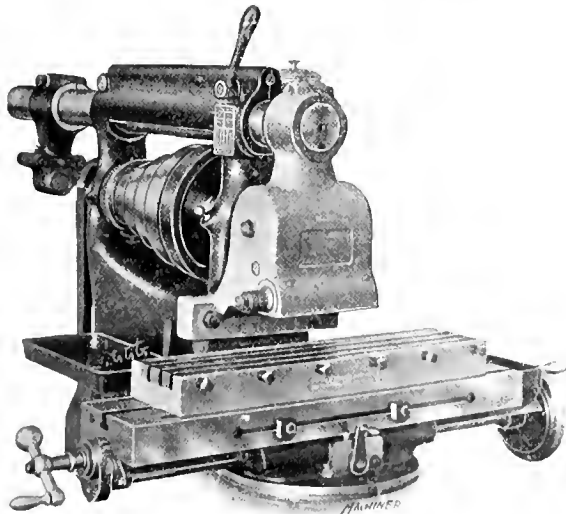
The Rack-cutting Attachment used with the Brown & Sharpe Milling Machine.
